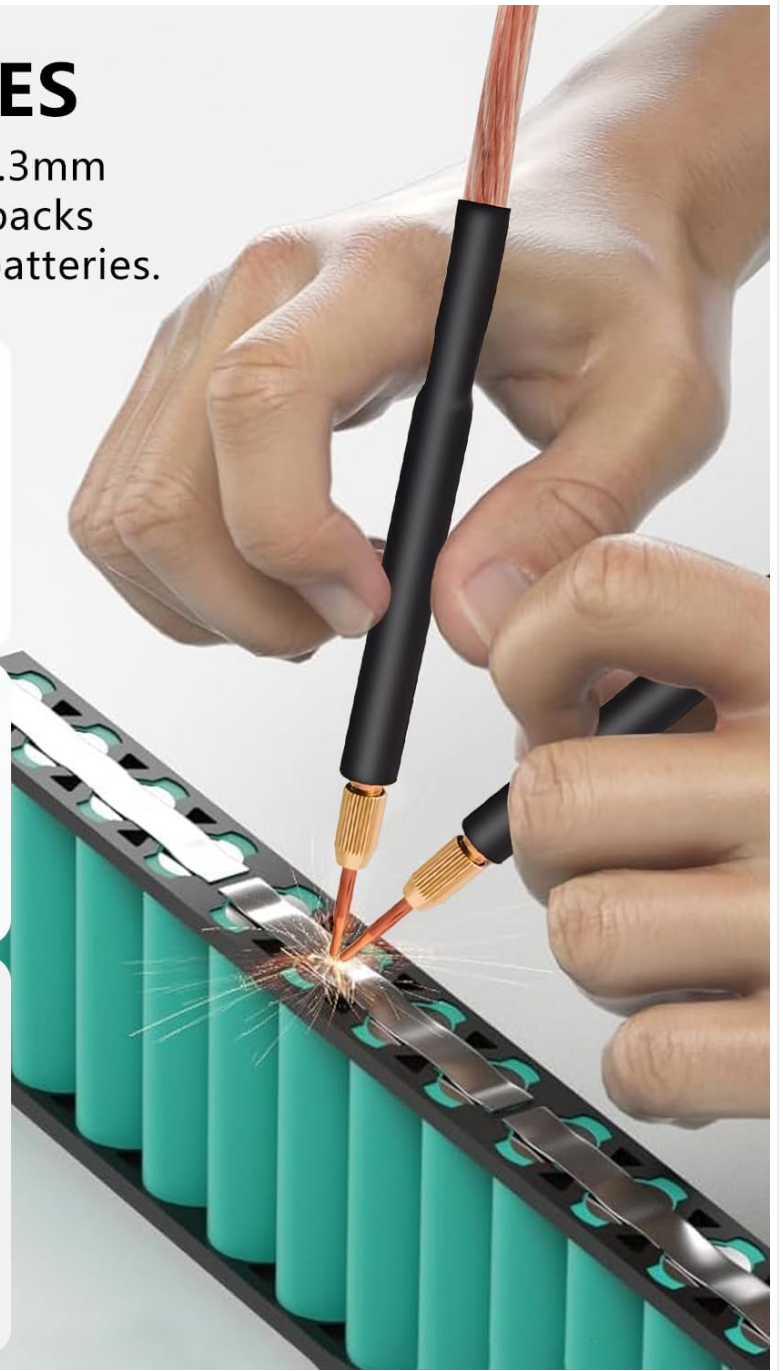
The spot welder's versatility is shown, capable of welding cylindrical batteries (18650, 26650, 32650) and repairing mobile phone batteries, ensuring solid and integrated solder joints.
